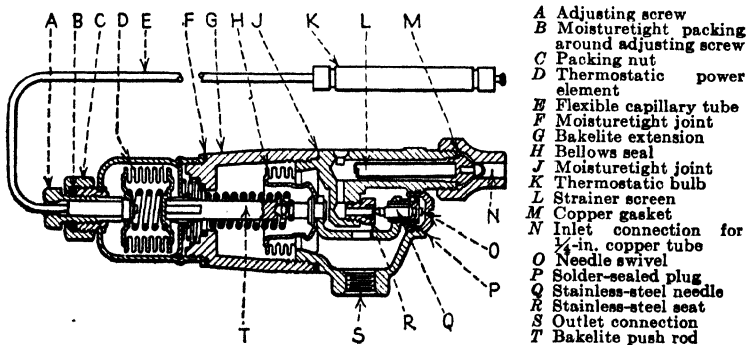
Cross-sectional view of a thermostatic expansion valve. (*Detroit Lubricator Co.*)
